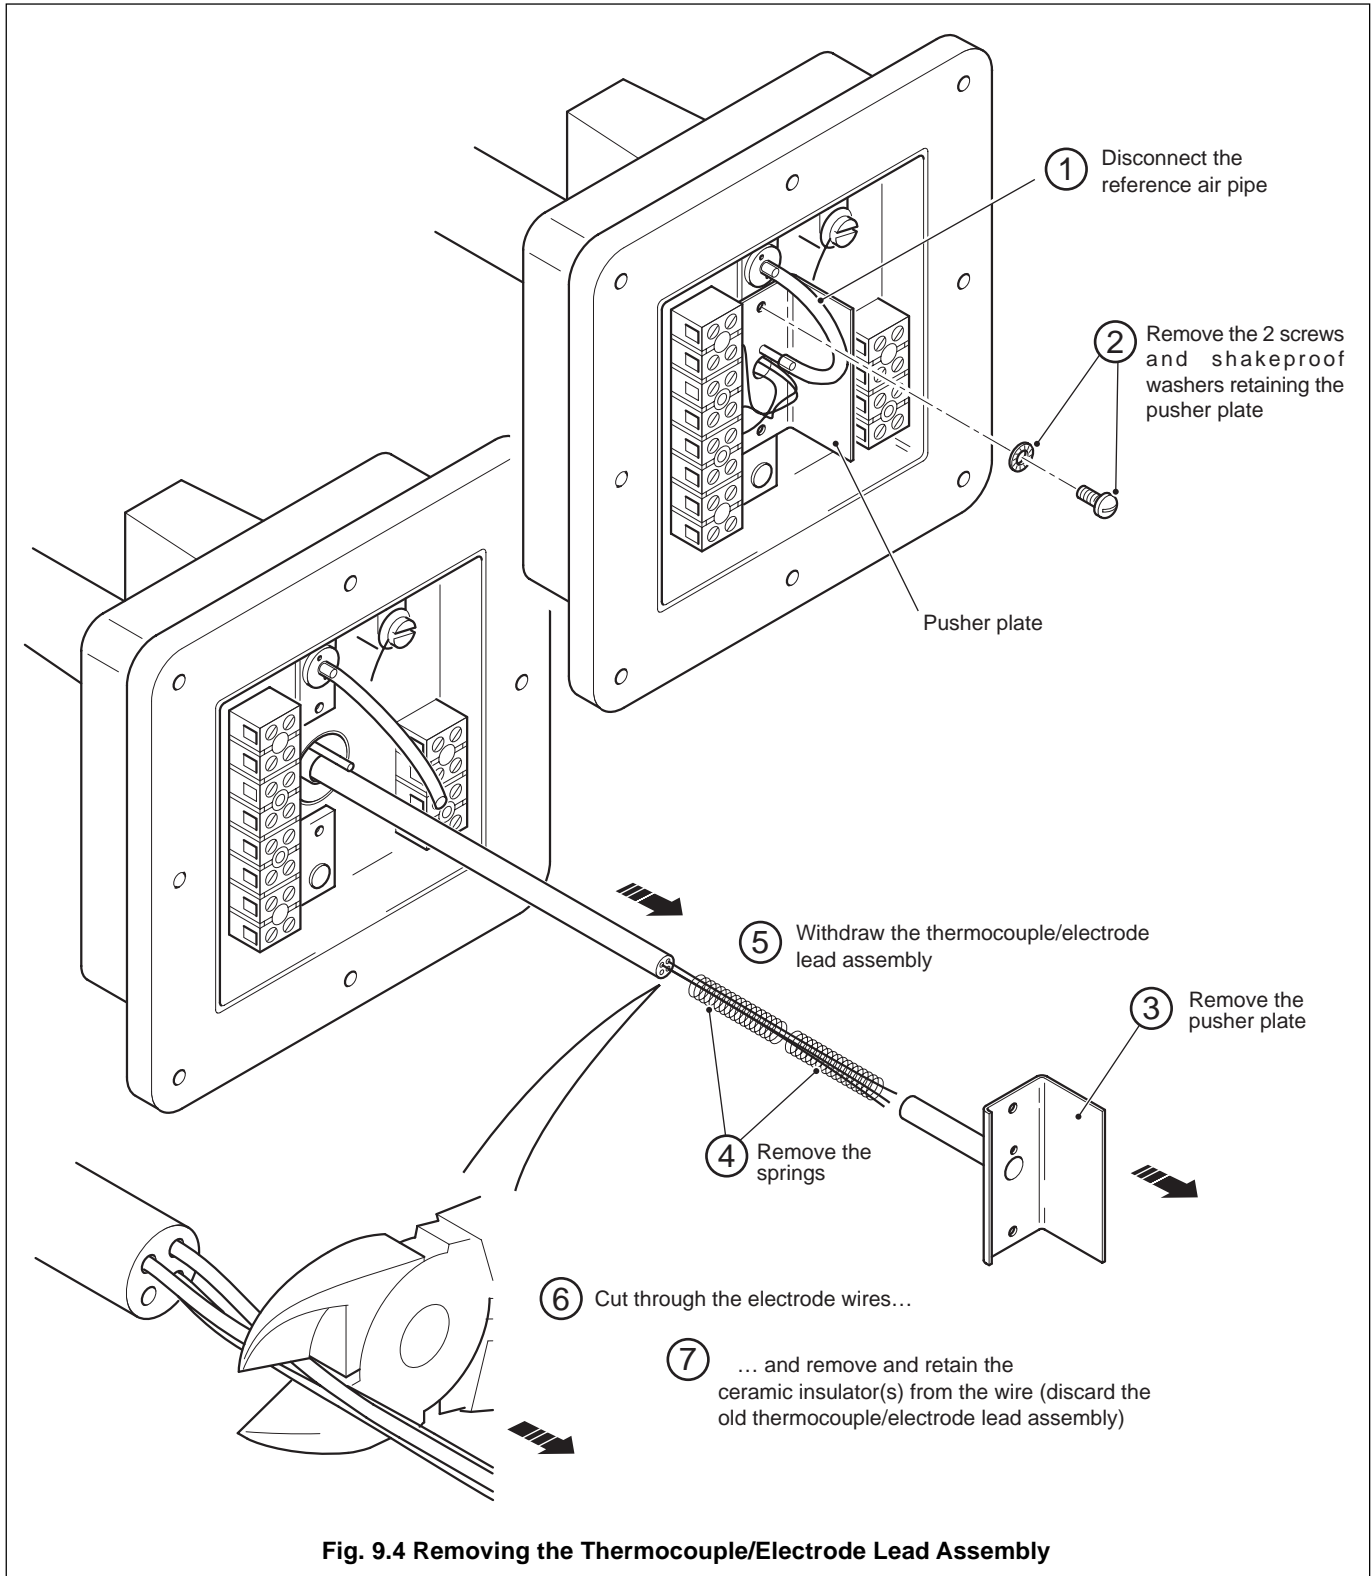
Removing the Thermocouple/Electrode Lead Assembly
